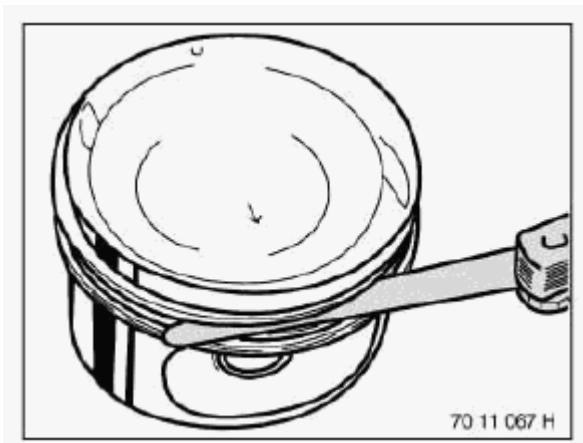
Measuring Axial Clearance Of Piston Rings In Piston Ring Groove
